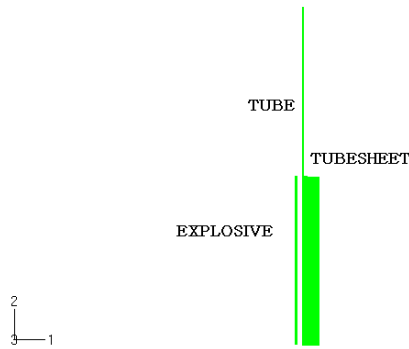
2-dimensional axis symmetry model of a tube expanded explosively.
